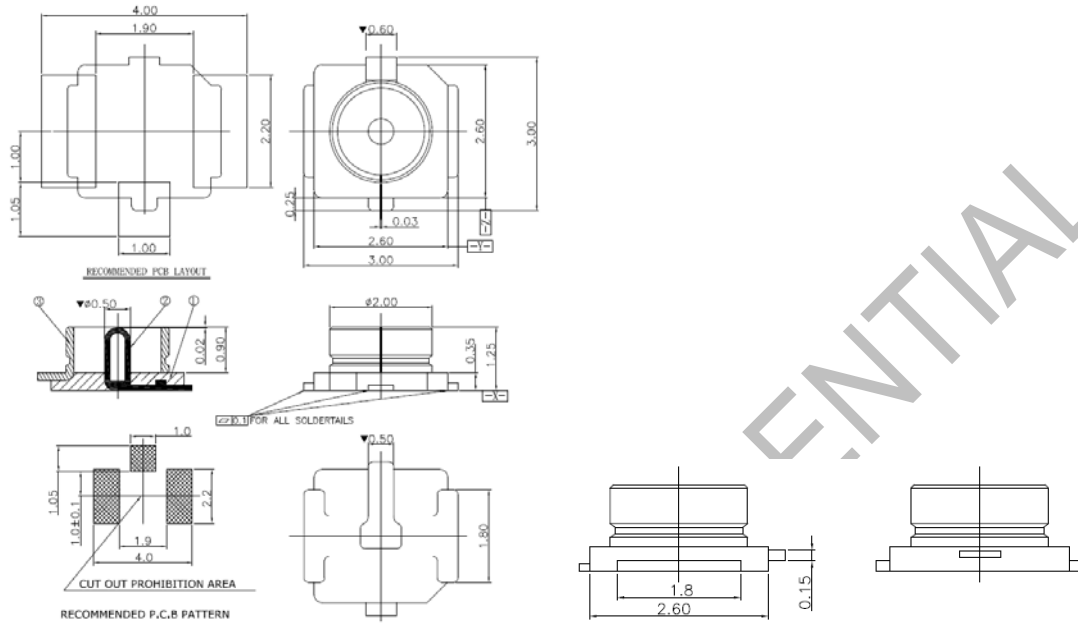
IPEX Connector Dimension Drawing (mm)
